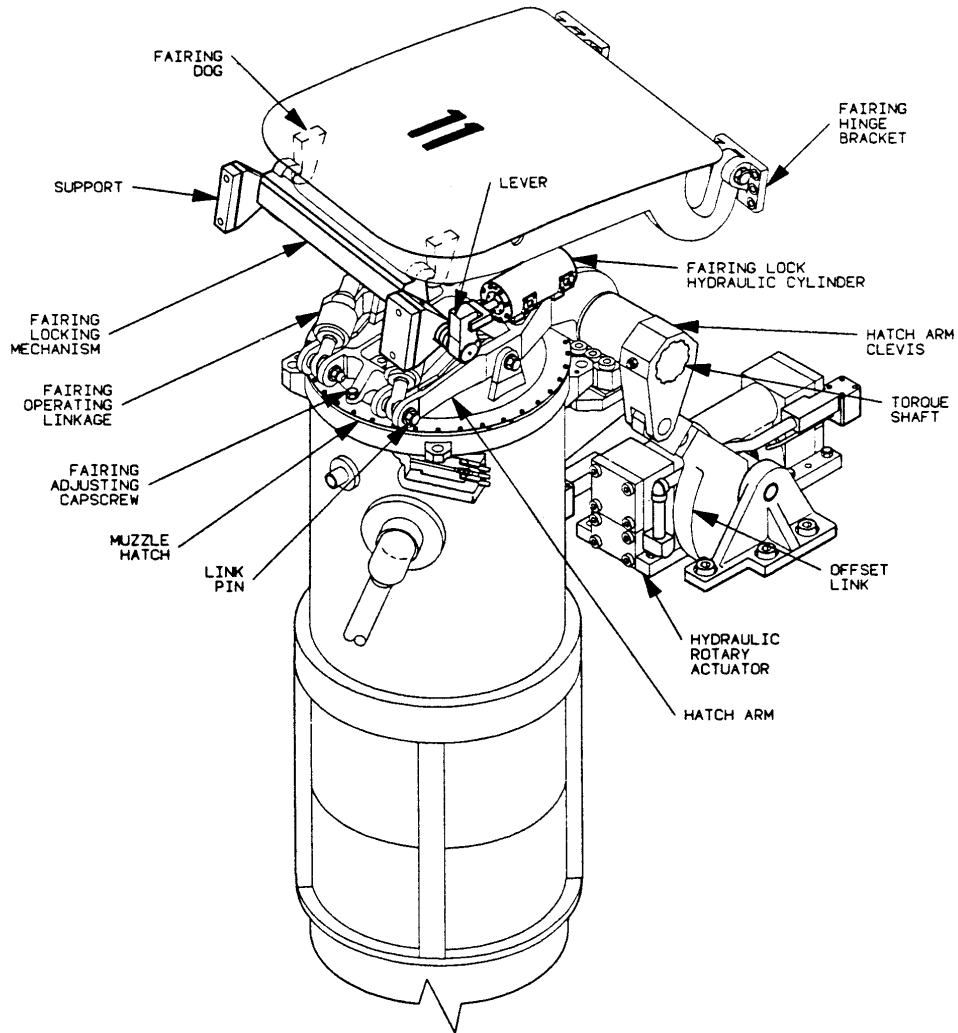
Missile Tube Muzzle Hatch Operating and Locking Mechanism (SSN 721 and Later)(Typical)
